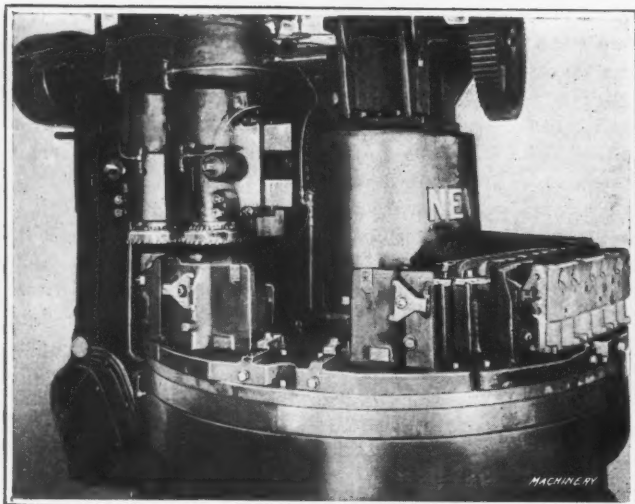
Jigs for holding Cylinder Castings while rough-milling
